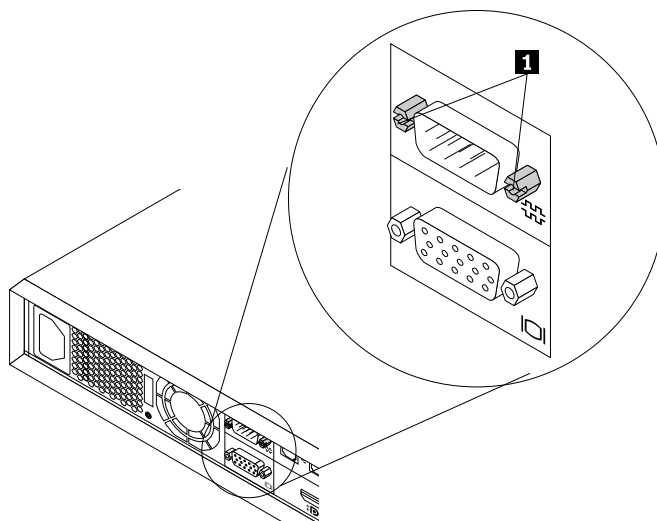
Reinstalling the two hexagonal screws to secure the rear of the system board
